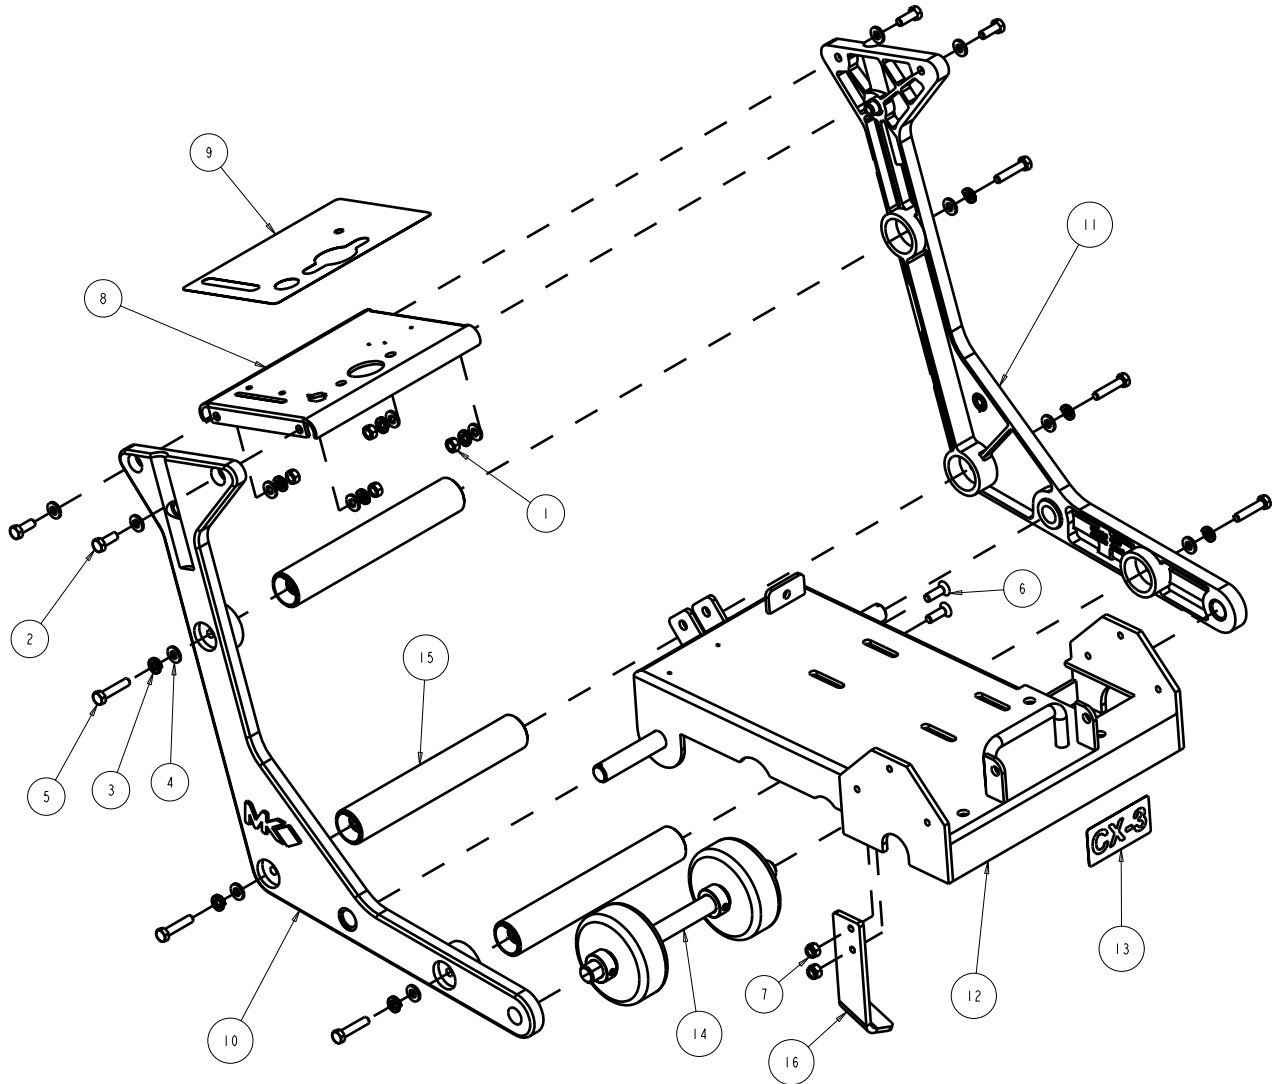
PARTS LIST: MK-CX3 LESS ENGINE - P/N 165974
